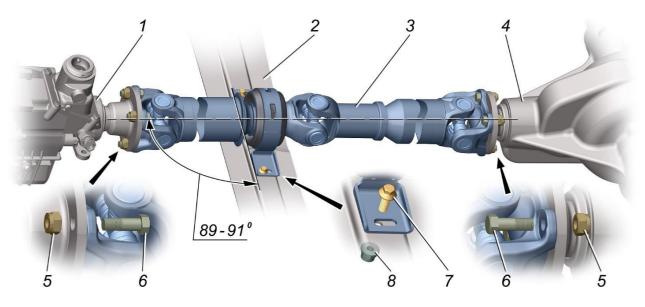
Driveline installation: 1 – gearbox; 2 – frame cross–member; 3 – driveline; 4 – rear axle; 6, 7 – bolts; 5, 8 – nuts
